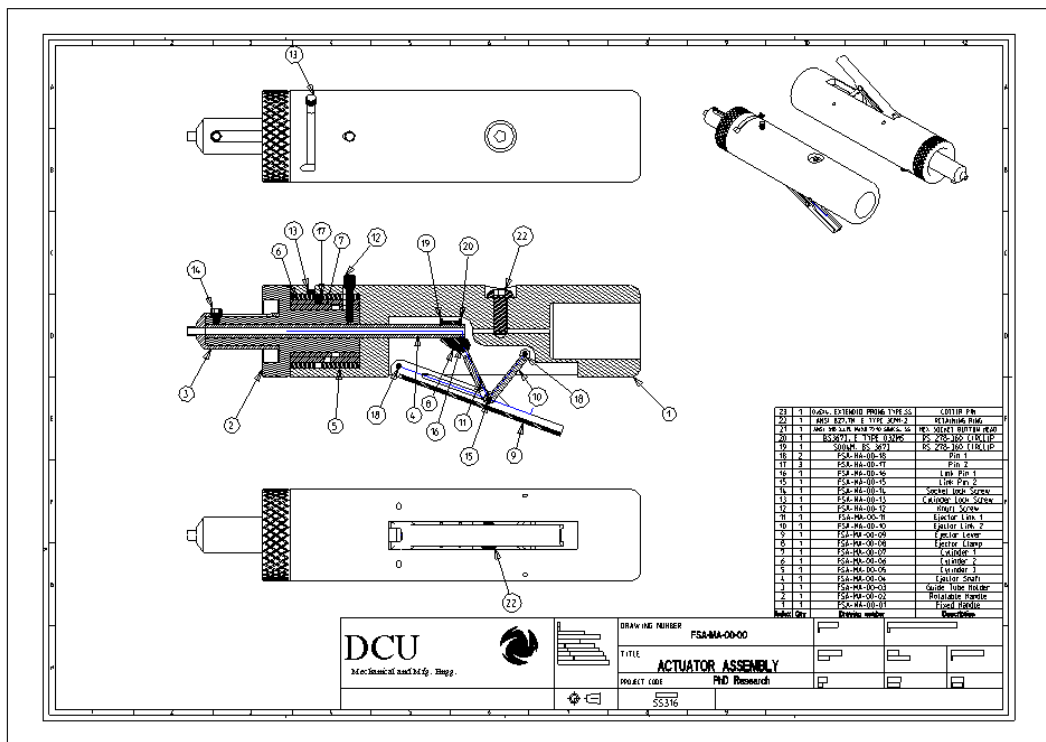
IMPROVED ACTUATOR ASSEMBLY
